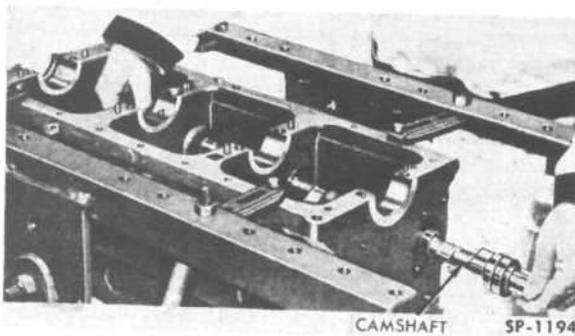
REMOVING CAMSHAFT FROM CYLINDER BLOCK
